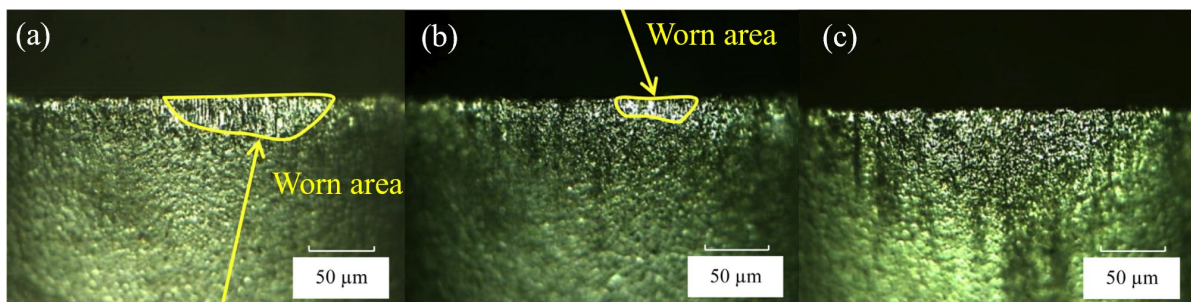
Microscope photographs ( $\times 1000$ ) of the tool flank faces in the three machining processes: (a) Conventional machining; (b) 1D vibration assisted machining; (c) 2D vibration assisted machining (Zhang *et al.*, 2014).
